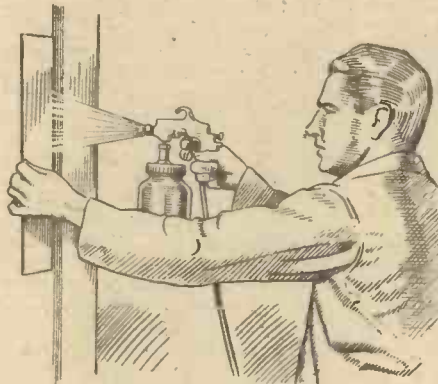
Cardboard strips can be used for a large number of spraying jobs where masking is necessary.
